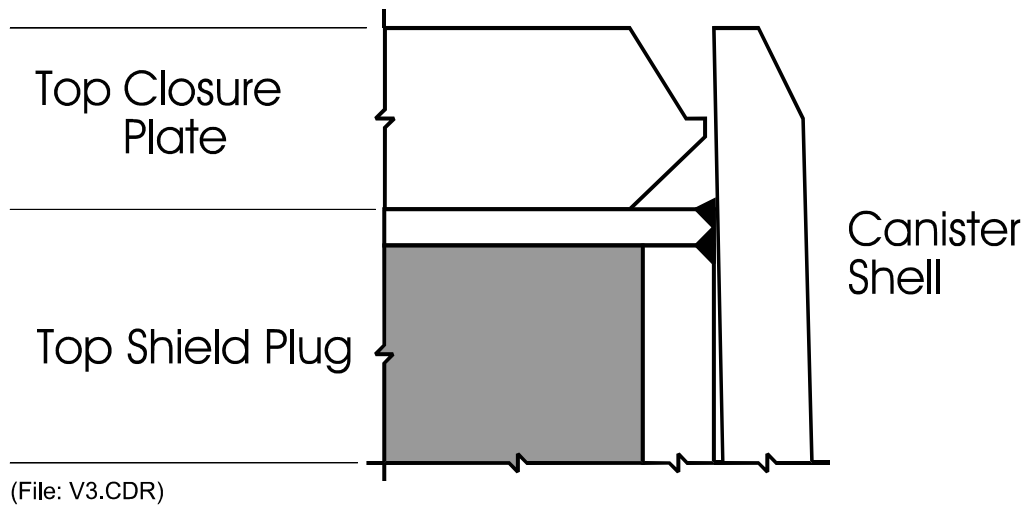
Modified Canister Closure and Weld Configuration
